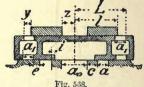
shows the two valves arranged for a fixed rate of expansion; fig. 568 for variable expansion, with the following reference letters.
